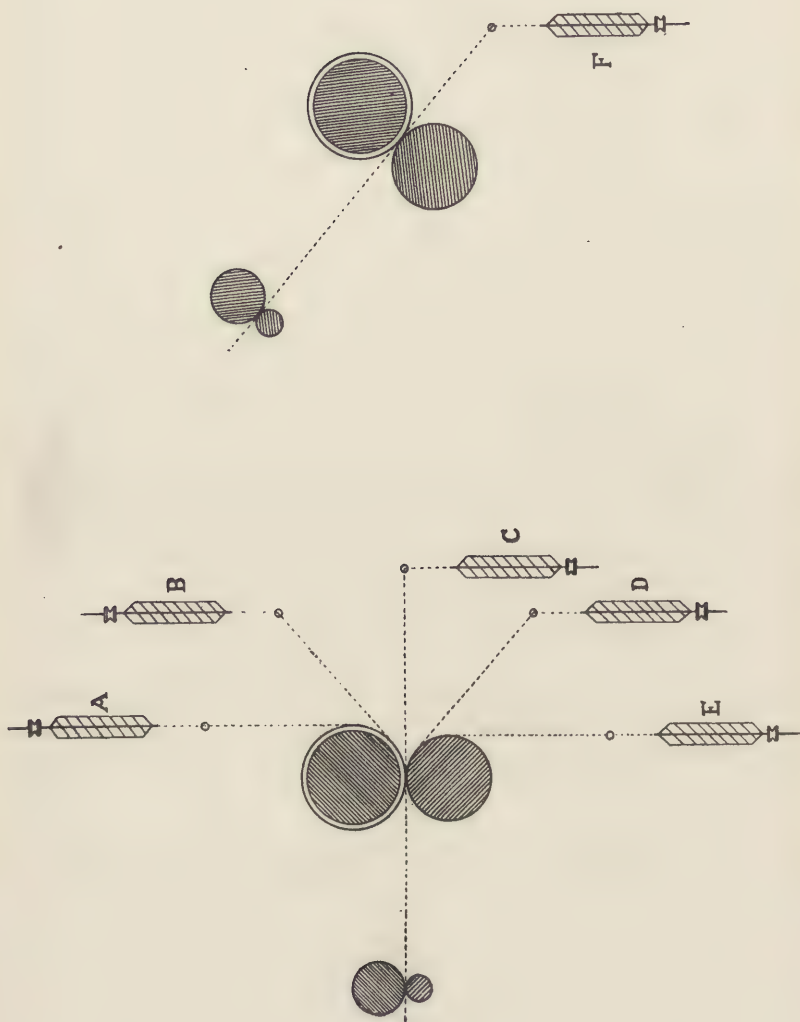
A.—Possible position of Spindle with Guide Eye in relationship to Drafting Rollers.
